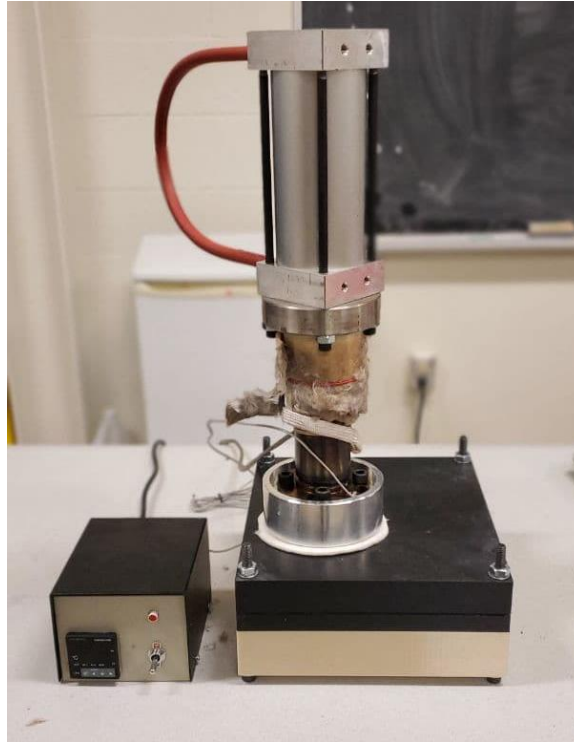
Experimental setup of the injection mold. The fluid inlets and outlets are not attached to the mold box here
